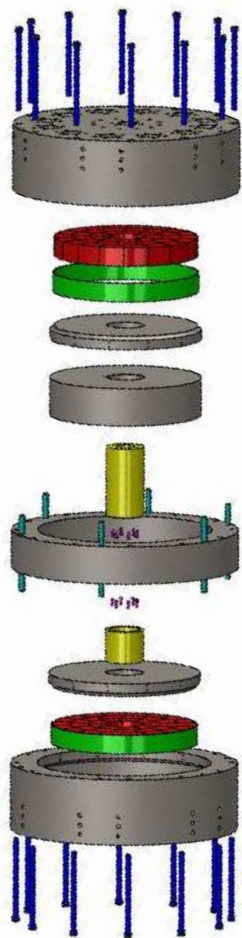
Exploded view of the magnet. Yoke parts are drawn in gray and permanent magnets in red. Each SmCo ring is comprised of 40 magnetic wedges. The golden sleeves are made from stainless steel and their purpose is to center the inner yokes and the magnet rings on the outer yoke pieces. Dowel pins, drawn in cyan, align the three parts of the outer yoke to each other.
